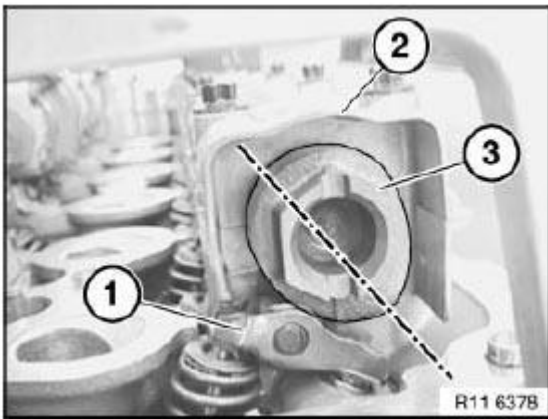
Identifying Exhaust Camshaft And Angle Camshaft
